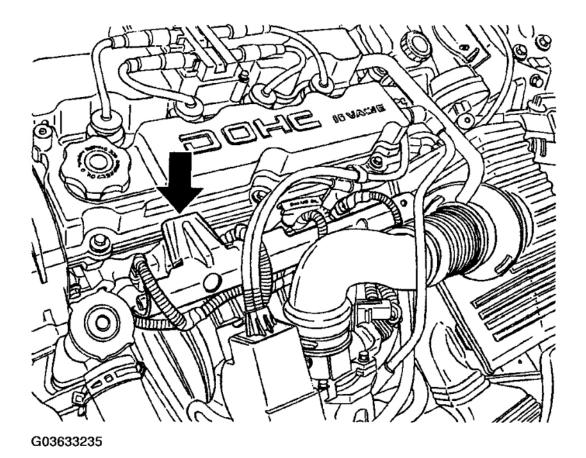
Identifying Fuel Rail Support Bracket Courtesy of DAIMLERCHRYSLER CORP.
